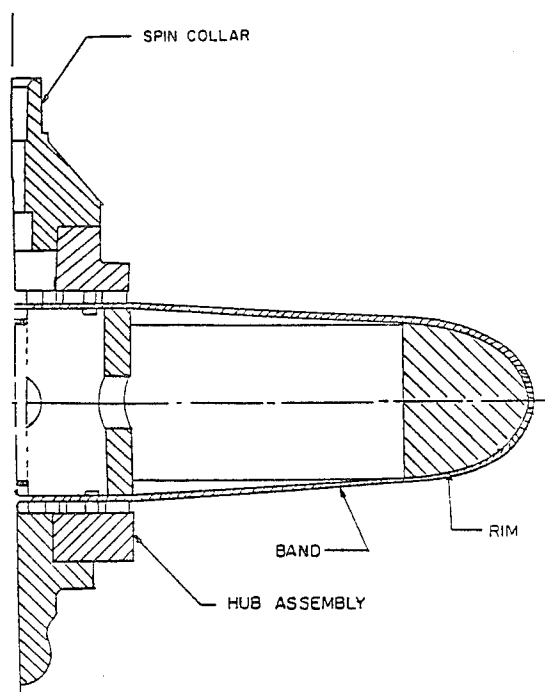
Cross-sectional view of one-half of the Sandia "wagonwheel" flywheel with a 25.4 cm (10.0 in.) outside radius.
